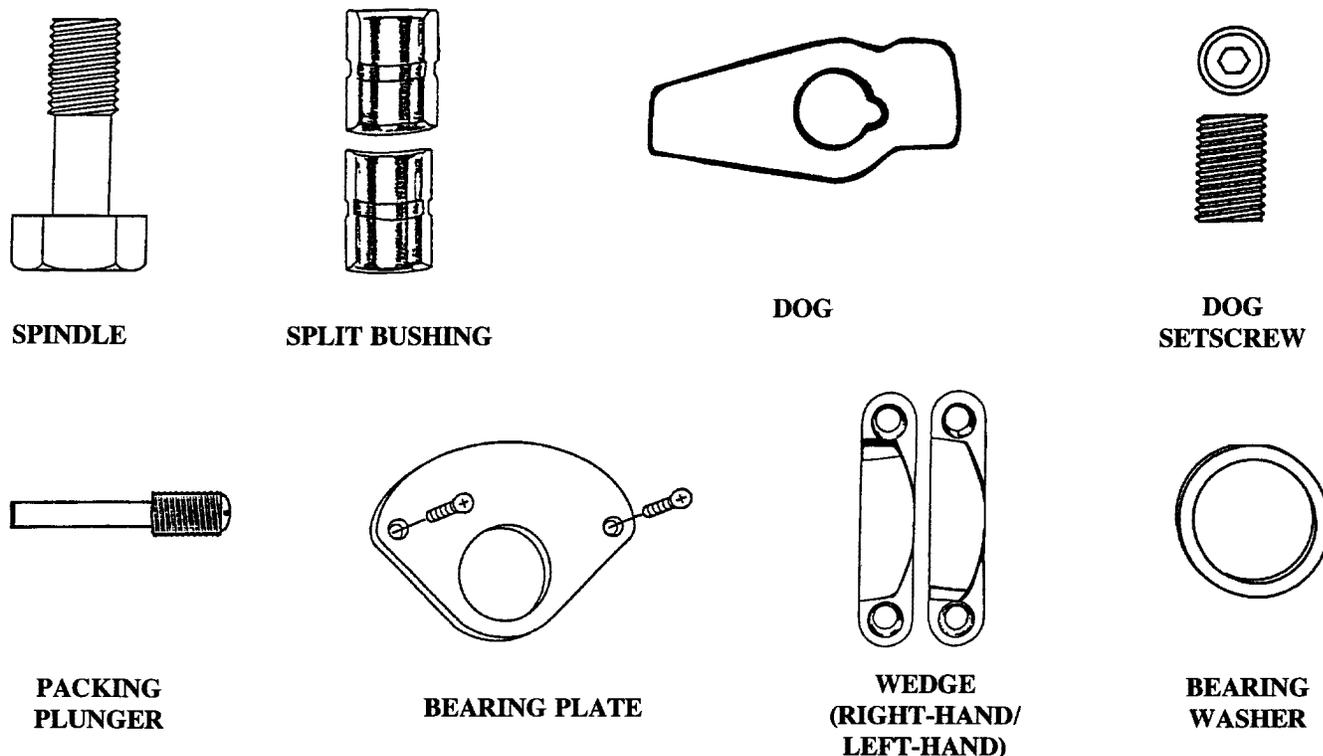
Spindle, Split Bushing, Dog and Dog Setscrew, Packing Plunger, Bearing Plate, Wedge (Right-Hand/Left-Hand), and Bearing Washer
